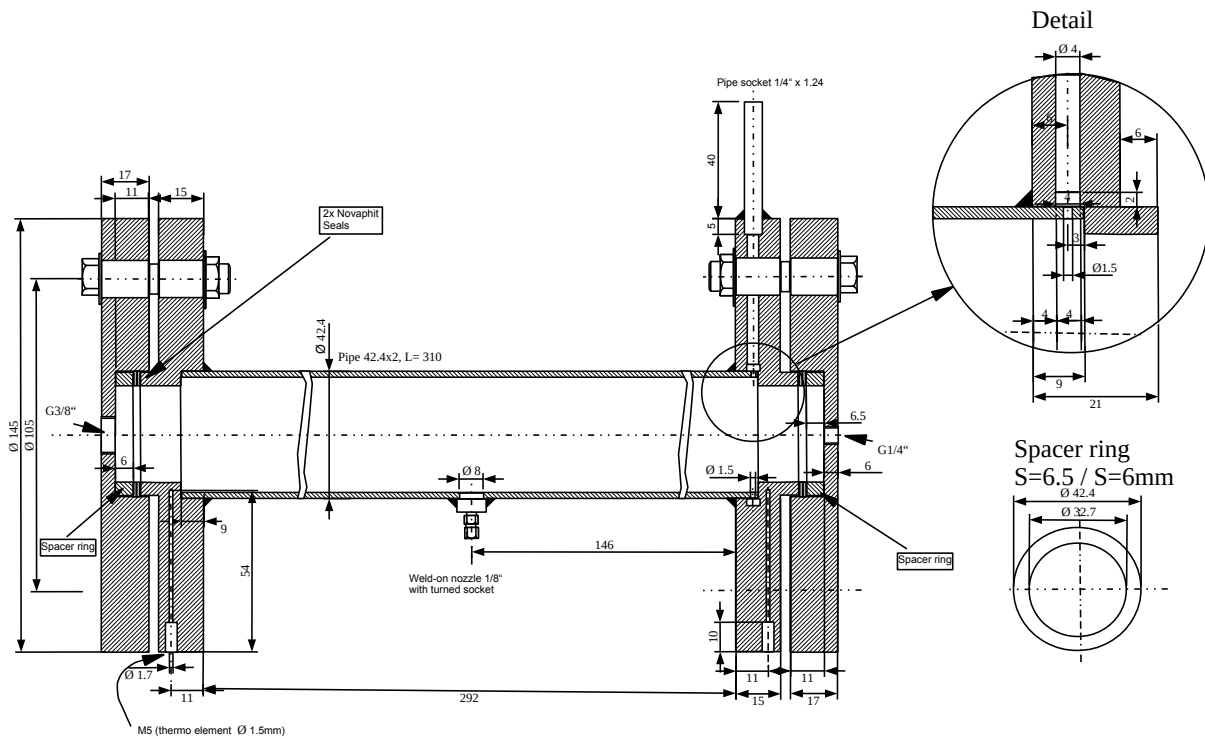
Constructive drawing of the implied reactor for the mini plant setup (MPZM)
